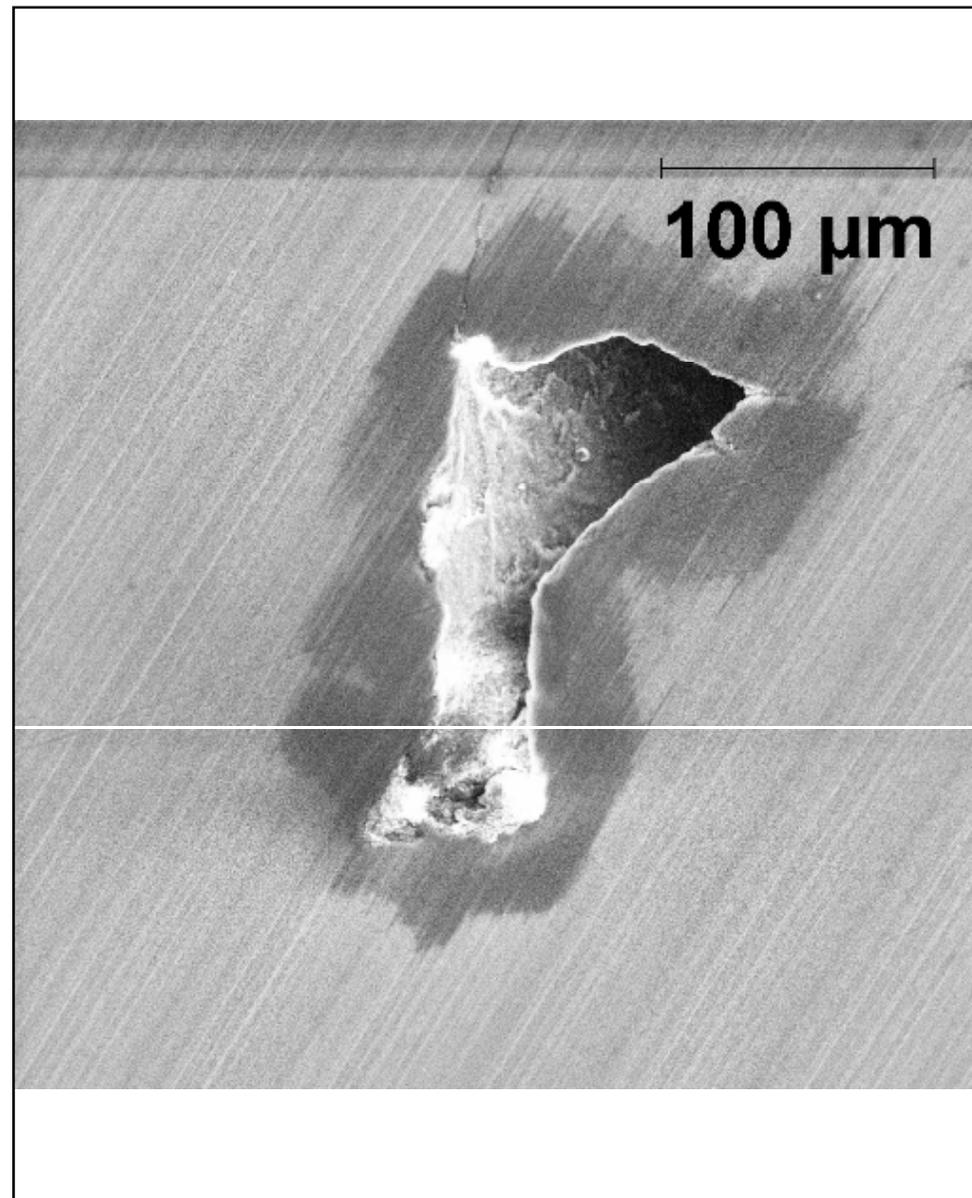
Orion cathode, as-machined. This cavity was revealed on the Mg surface, well away from the weld boundary. The cause of the darkening is possibly due to wicking out of alcohol and contaminants from the cavity interior onto the surrounding surface during drying, giving a low secondary electron yield at the rim
